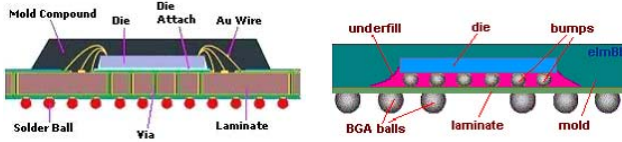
Example cross-sections of PBGA (left) and FPBGA (right) package types
